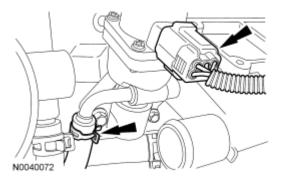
Locating Exhaust Gas Recirculation (EGR) Coolant Hose And Electrical Connector Courtesy of FORD MOTOR CO.
